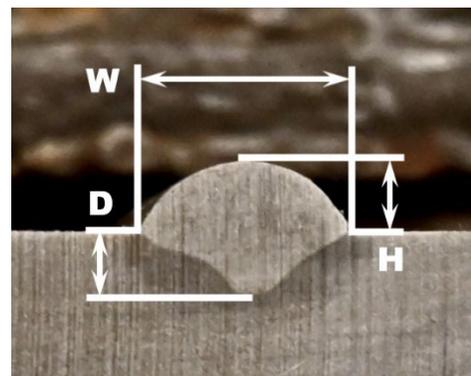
Weld bead cross section showing width (W), height (H), and penetration depth (D).
